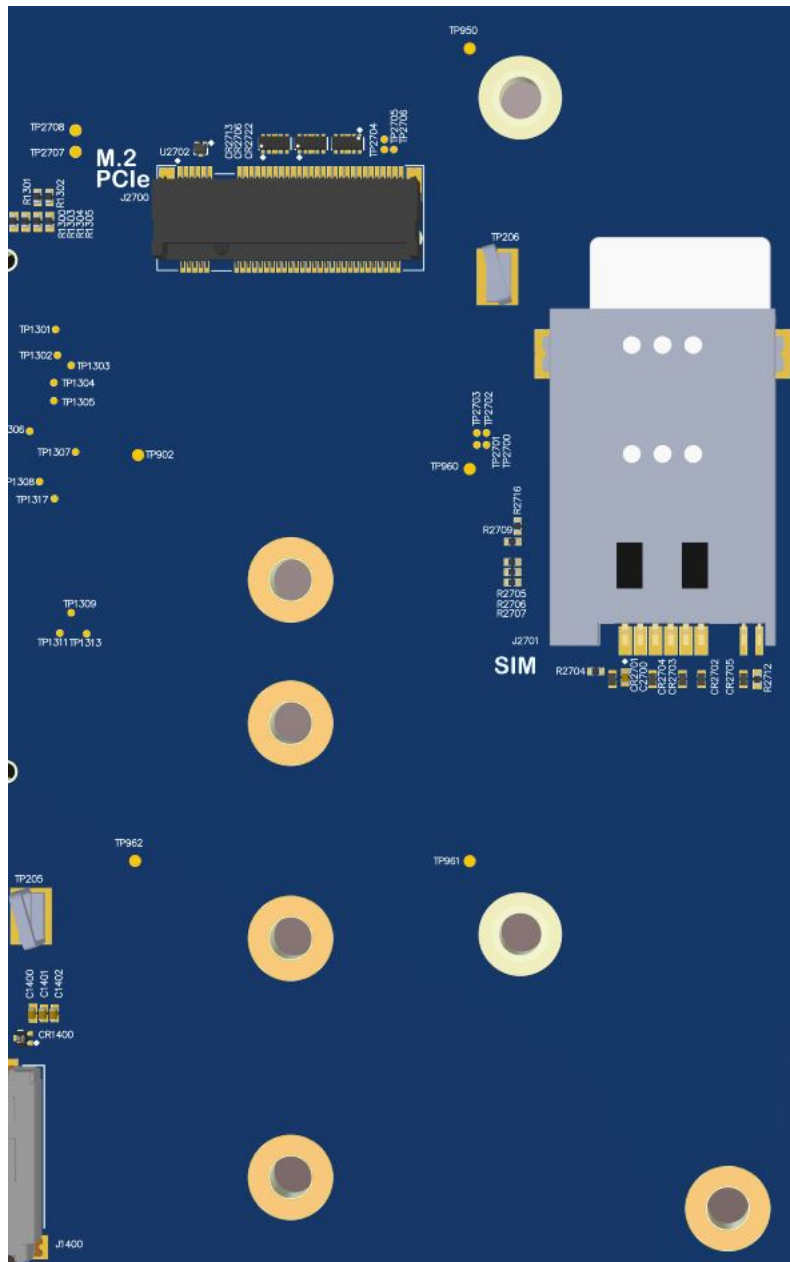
M.2 PCIe and Optional SIM Card Sockets
